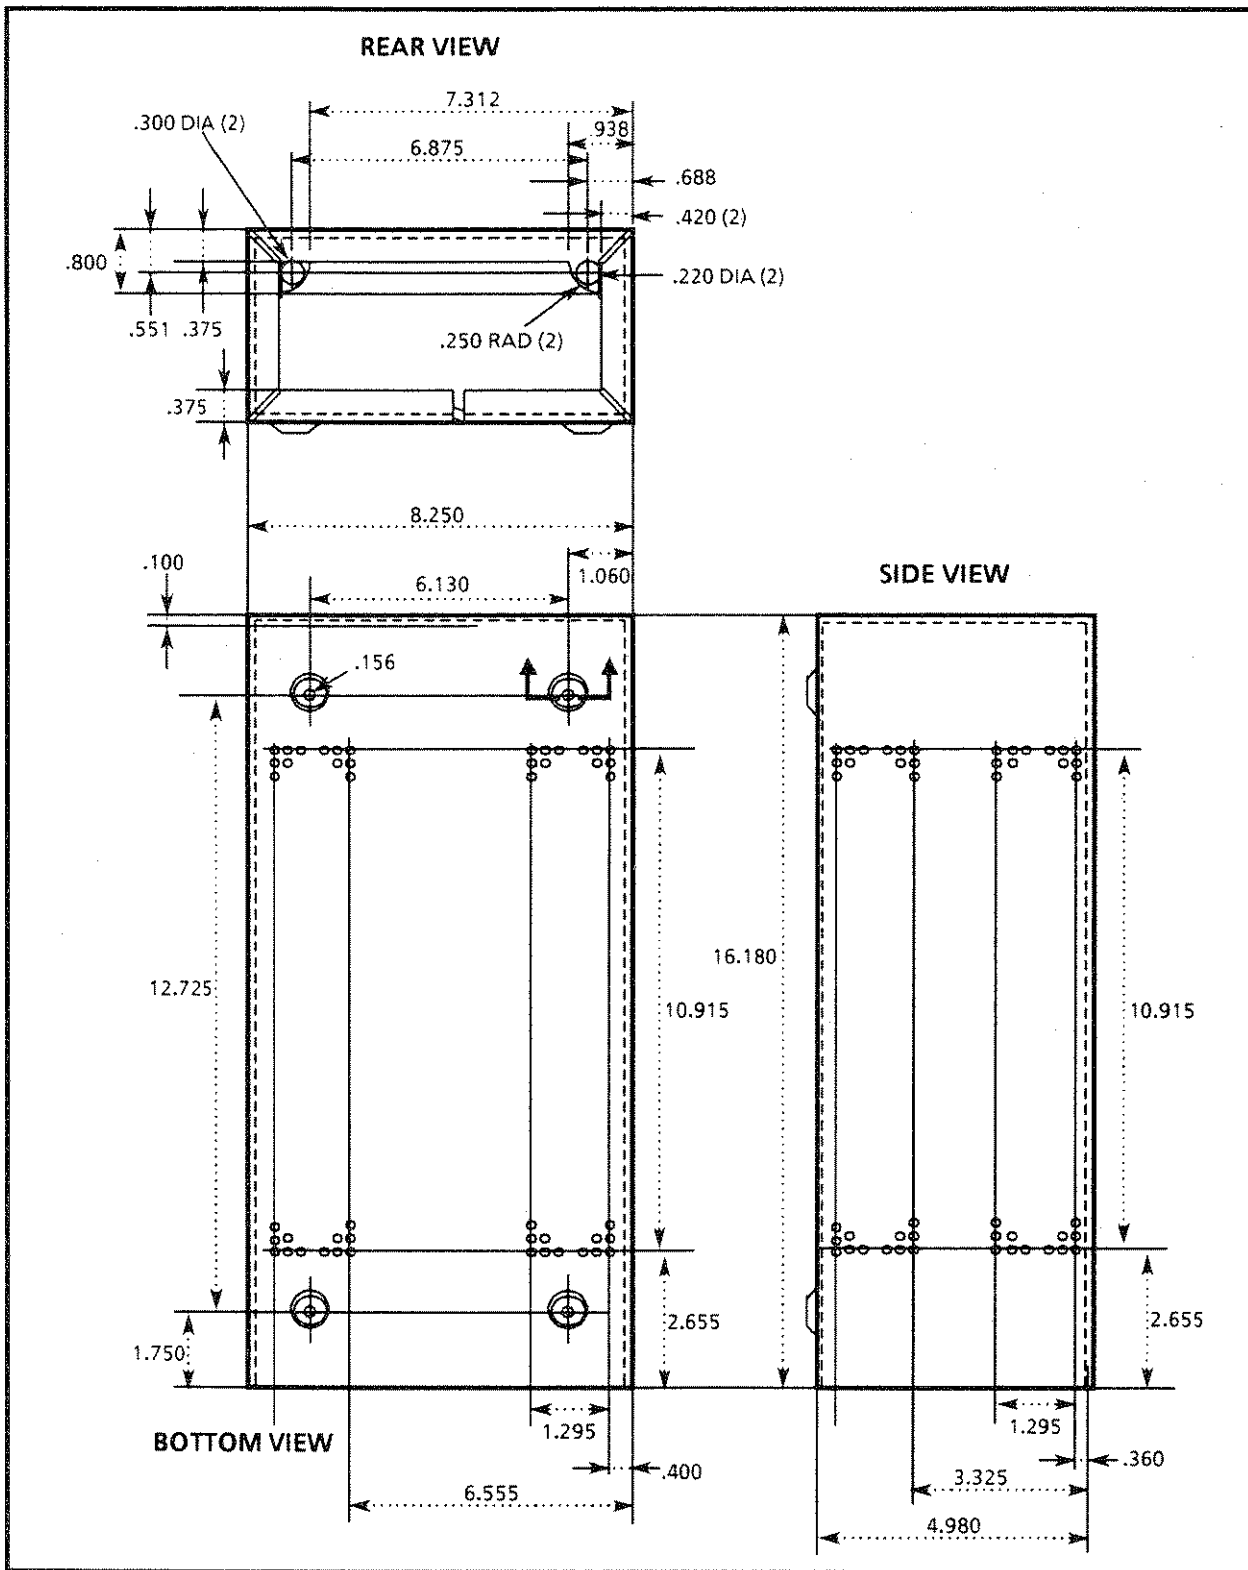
Dimensional drawing of the 1700F00 cabinet.
